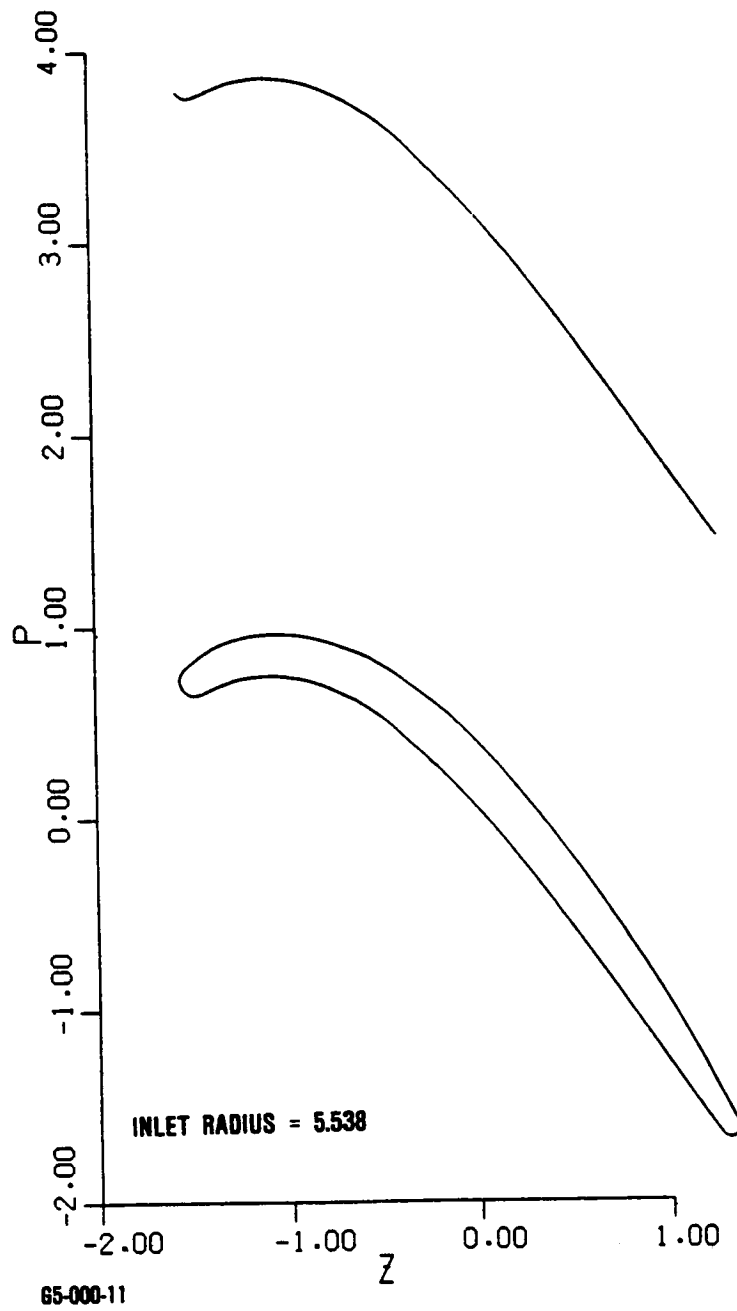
MATE TFE731 HP Turbine Blade Design Section 6.
